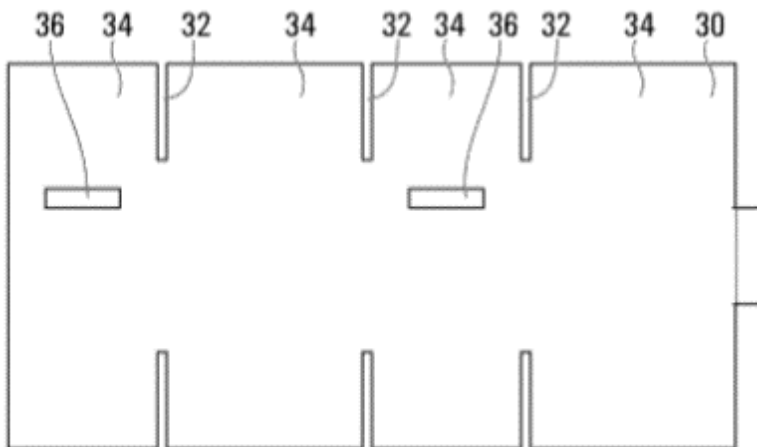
illustrates a sheet (28) being cut. The sheet is formed into a blank (30) with cutout holes for hands (36), flaps (34) and cut lines (32) in Figure 2 after cutting.
